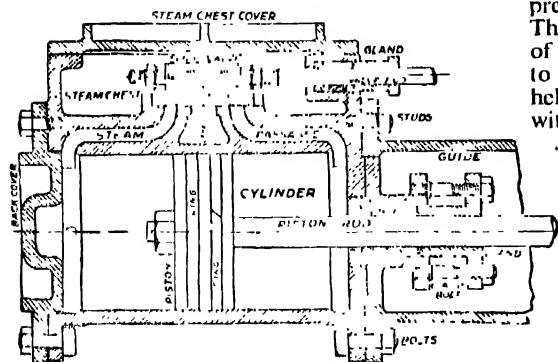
CYLINDER AND VALVE CHEST. Section showing piston rod and steam control slide valve.
